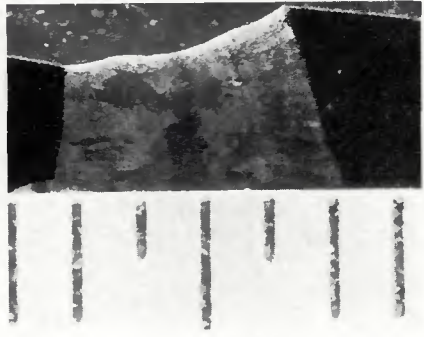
Weld UG 14(100)-16, 5G position, zero root opening, 1.59 mm (1/16 in.) mismatch. 1 mm scale (reduced 53% on reproduction)
